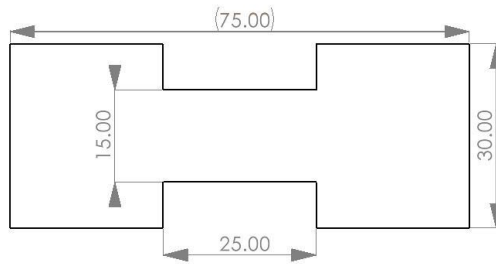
Dimensions of the I-beam (All dimensions are in mm)
